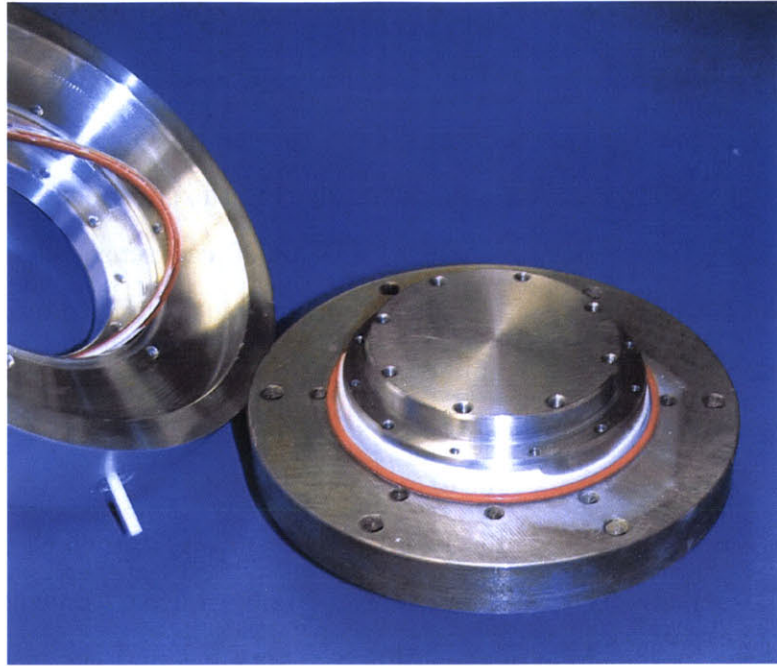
Cast silicone rubber compression bearing immediately after removal from the mold.
